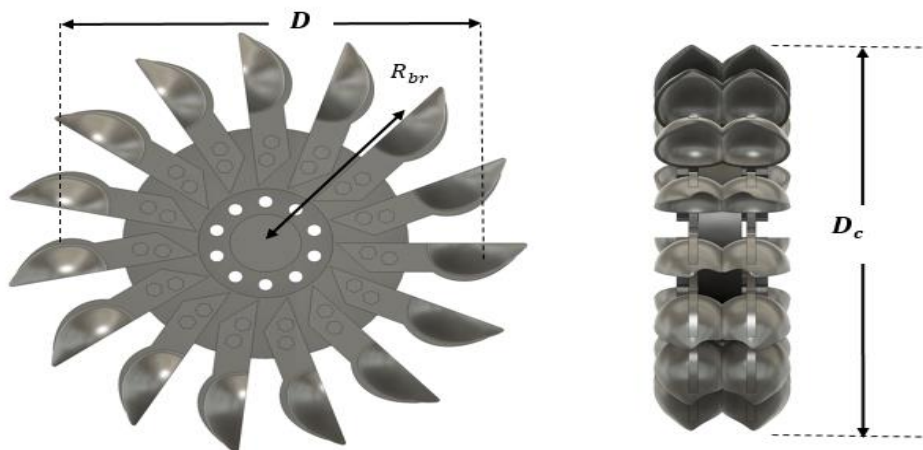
3-dimension view of the bucket of a Pelton wheel.
